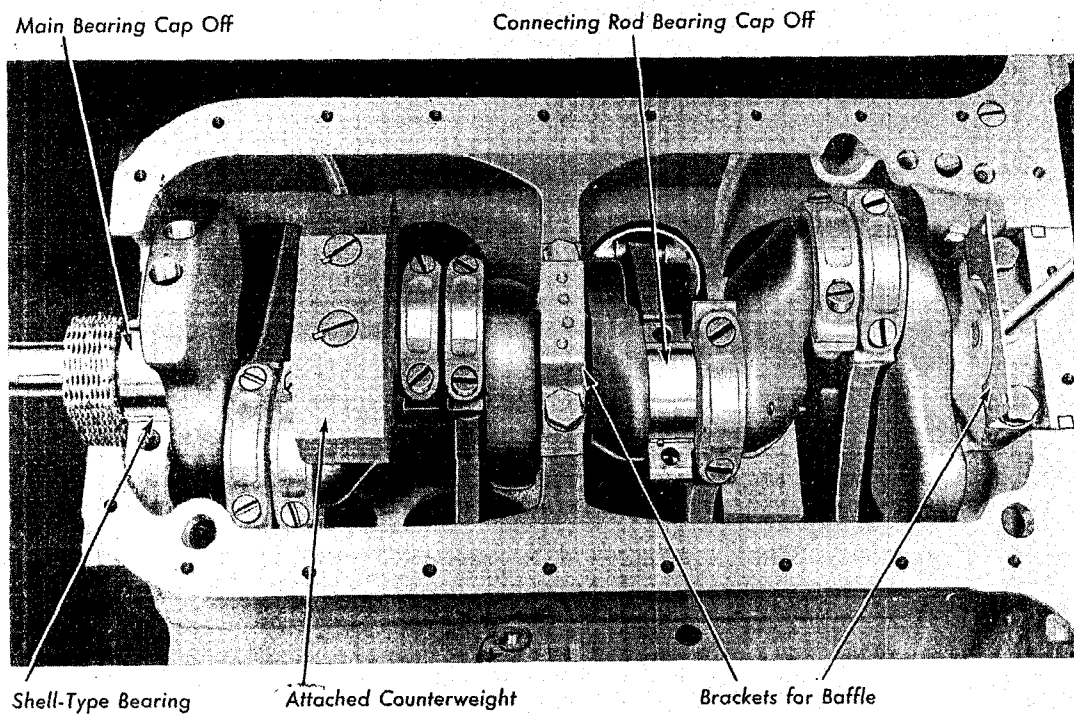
Engine Crankcase Interior—Series 37-50, 60, 65, 70, 75
